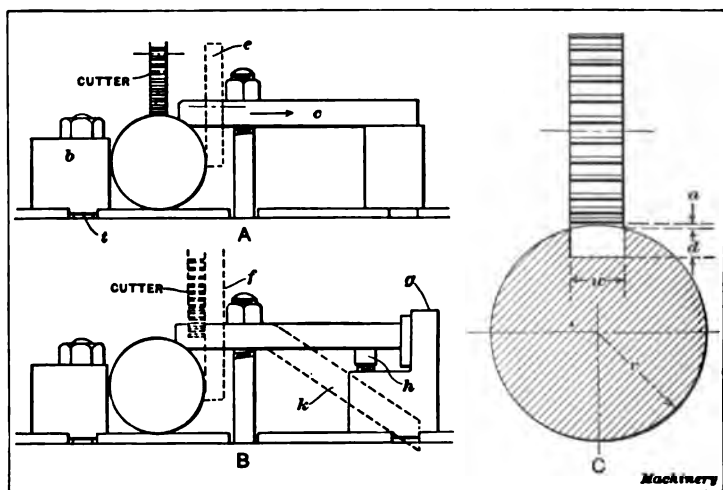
Views Illustrating Simple Methods of Holding Cylindrical Work and Setting Cutter for Keyseating
